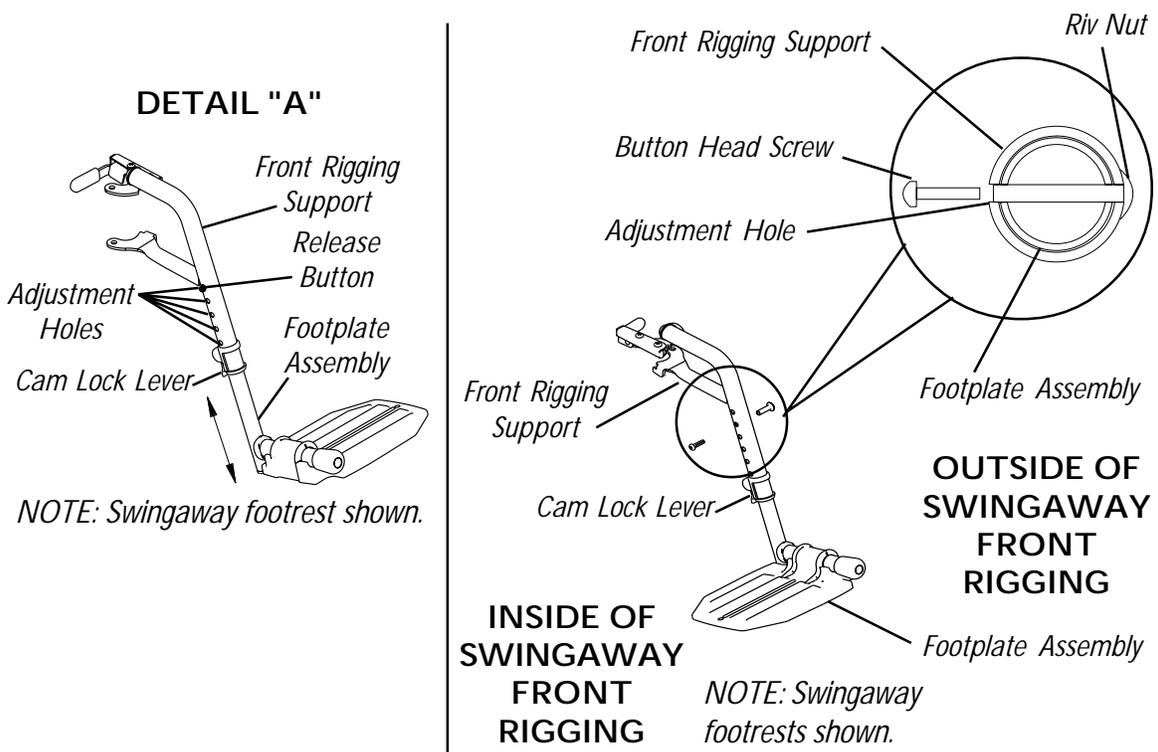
INSTALLING THE BOLT-IN-PLACE FRONT RIGGING KIT
